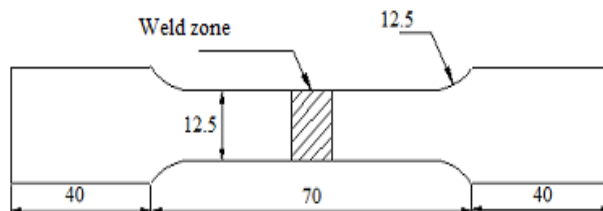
Dimensions of the tensile test specimens [ASTM E8M-08]
